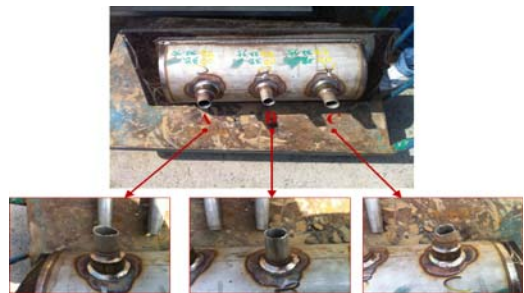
Pipe Fracture for Three Type Weld Specimens
